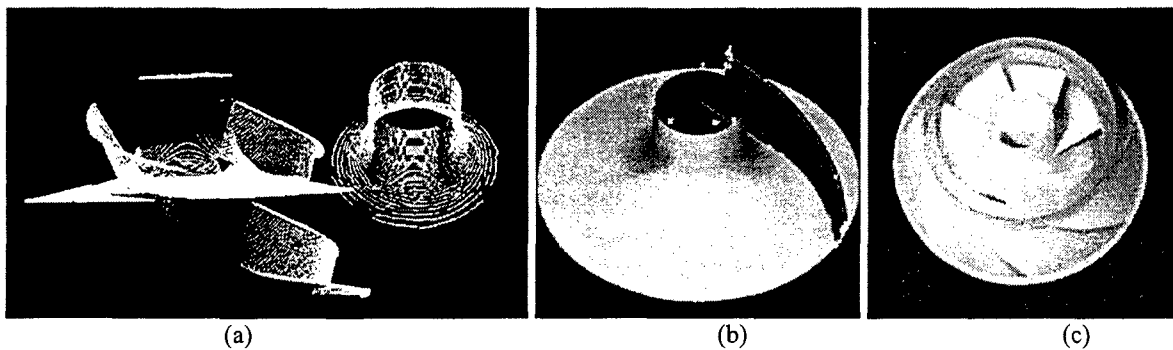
Impeller surface modeling. (a) Multi-view range data, (b) fitted impeller vane surfaces, (c) rapid prototyping.
